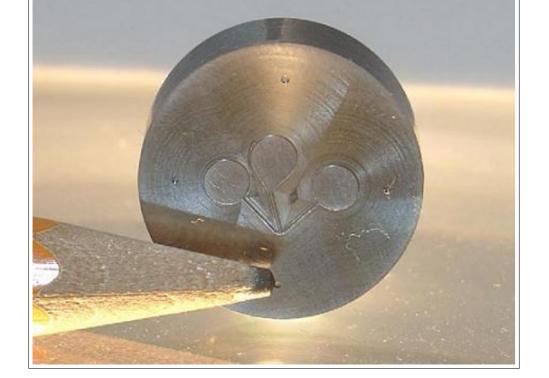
Micro-injection mould, Kernmicrotechnic
